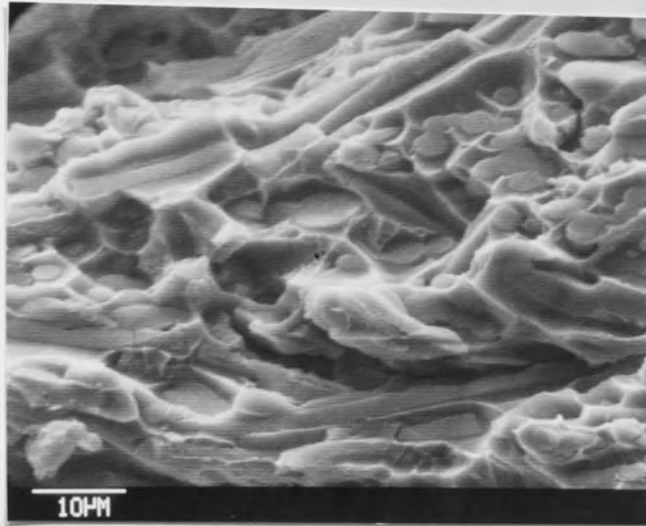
Typical fatigue fracture surface of a Saffil/6061-T6 (T) specimen.
